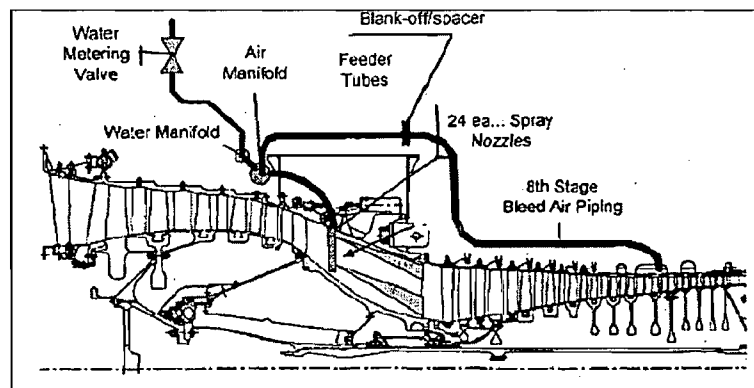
Half Section View of LM6000 Gas Turbine Compressor Section³
